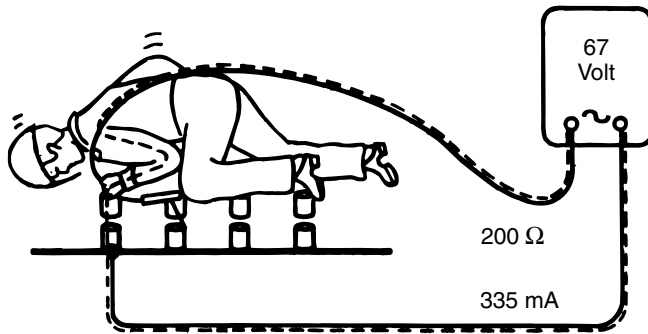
Welder Pulls Faulty Cable Over Shoulder and Receives Fatal Shock.
